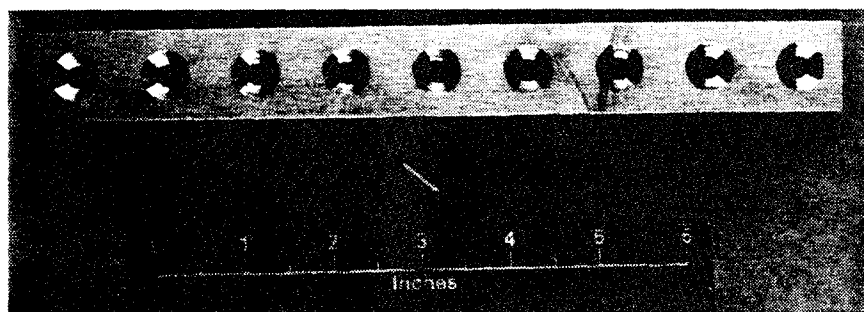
Aluminum-Alloy Bar Containing Countersunk Fastener Holes With Representative IVD Aluminum-Coated/Conversion-Coated Fastener Ready for Installation
